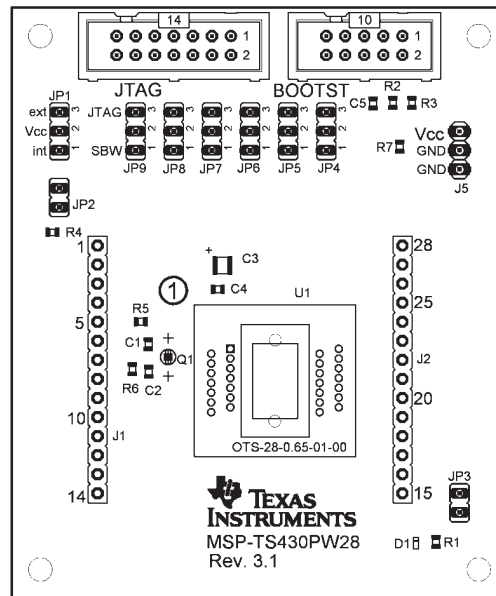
MSP-TS430PW28 Target Socket Module, PCB
